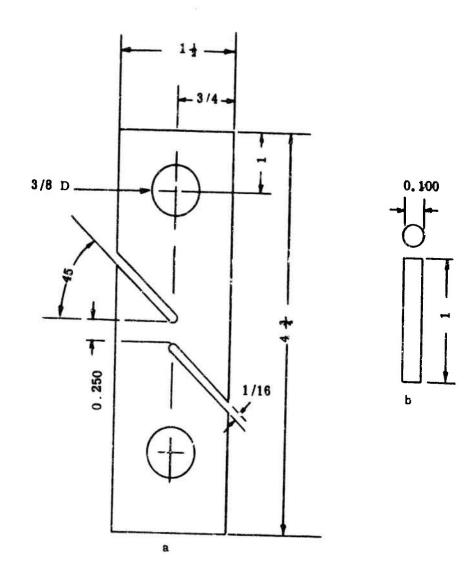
Shear Specimen for Sheet (a) and Bar (b) Materials
